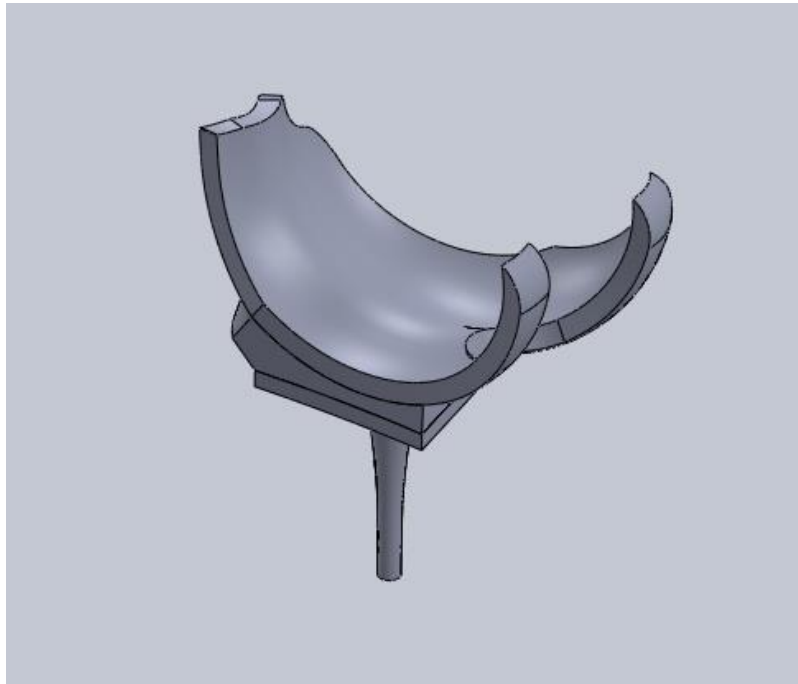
A 3D model of a Knee joint can be fabricated using SLM Technology (designed by the Authors of this article).
